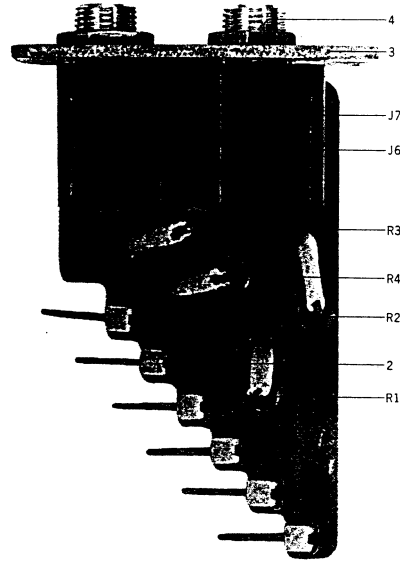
PHOTO OF MIC, DUB P.C. BOARD
